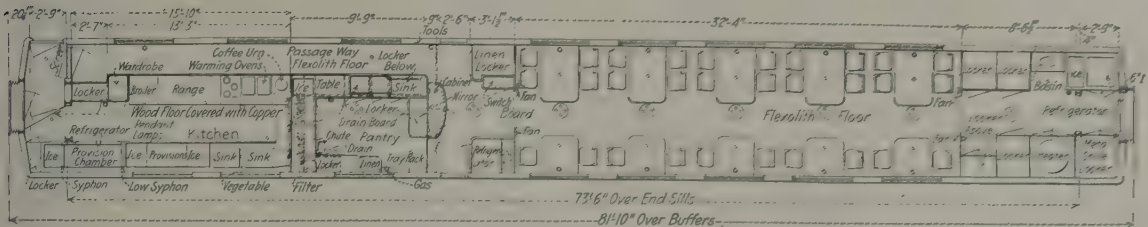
Floor Plan of Canadian Government Railways Dining Car. Builder, Canadian Car & Foundry Co.
